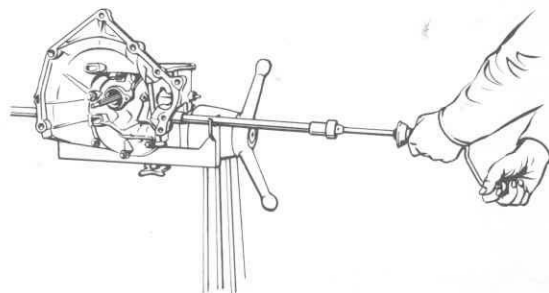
14 Checking the rolling torque of the differential roller bearings using tool A.70315 and dynamometer A.95697
